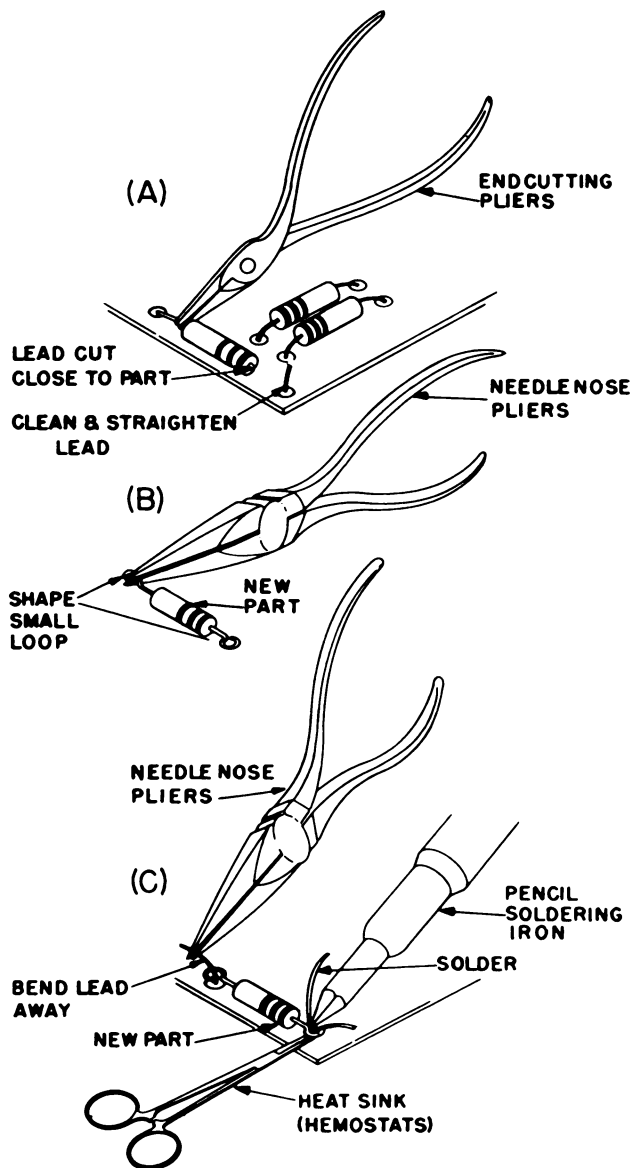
Replacing a defective part by cutting its leads.
